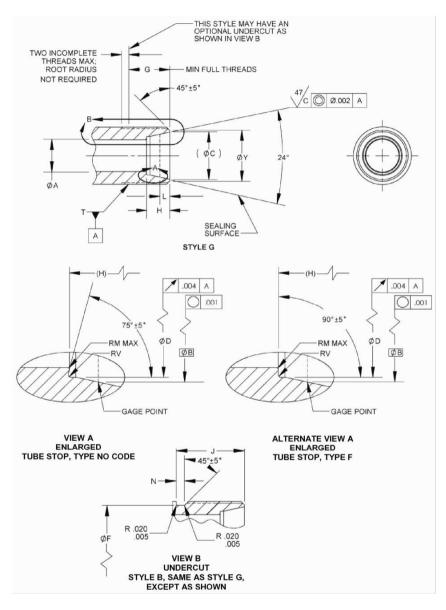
FITTING END DESIGN, STYLE B AND G
